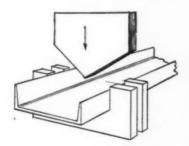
PARTING SHEAR, KNIFE ARRANGEMENT
